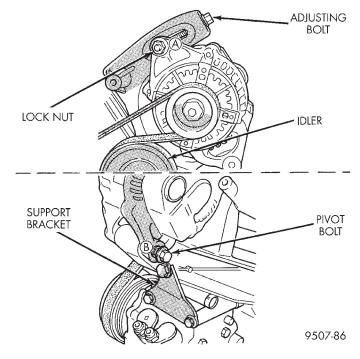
Air Conditioning Compressor and Generator Belt Adjustment
